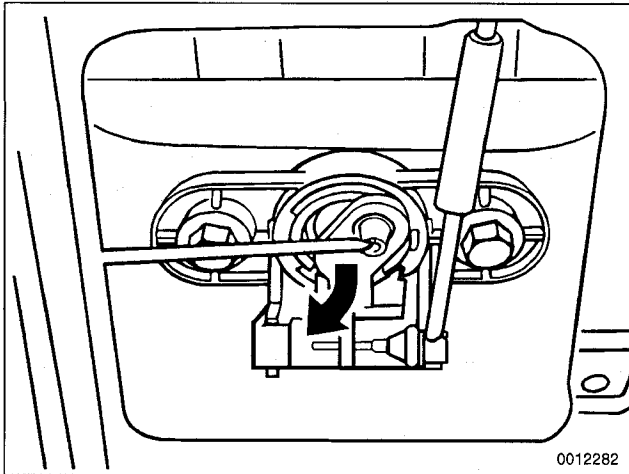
Pull off luggage compartment lock actuating rod in the direction of arrow.
